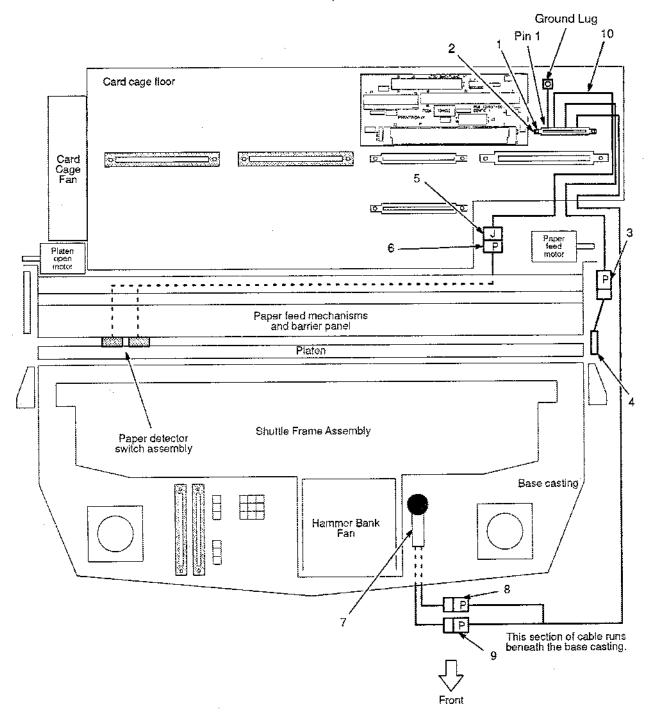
Cable Assembly W5, Intermediate, and Cover Open Switch Assembly
